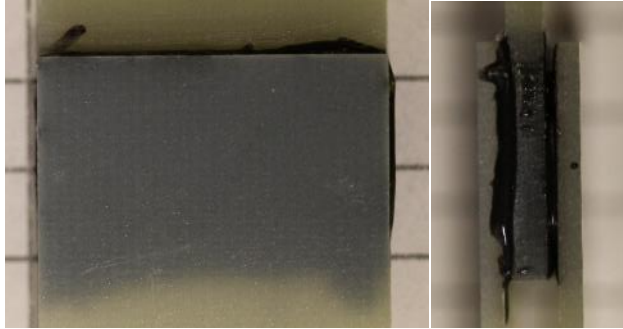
Adhered JBQ specimen with front view (left) and side view (right).
